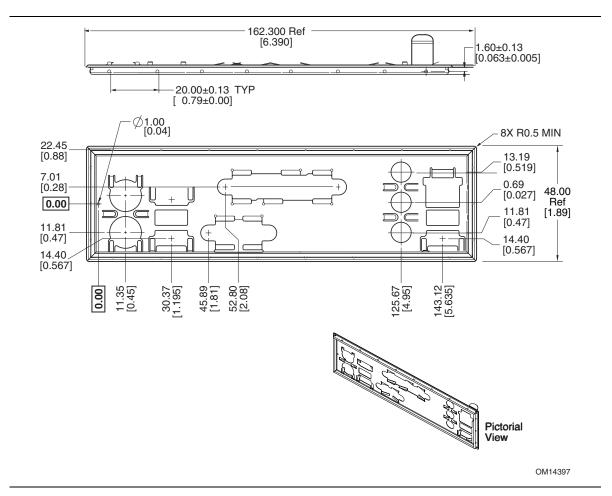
I/O Shield Dimensions (for Boards with the 2-Channel Audio Subsystem)
